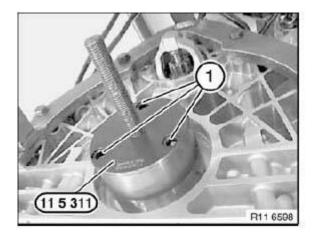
Identifying Special Tool 11 5 311 Courtesy of BMW OF NORTH AMERICA, INC.
